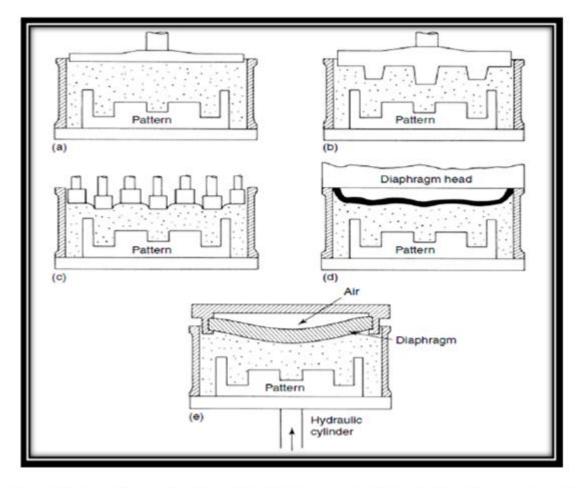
Designs of squeeze head for mold making (a) conventional squeeze, (b) profile squeeze head, (c) equalizing piston squeeze, (d) diaphragm squeeze, (e) high pressure hydra-pneumatic squeeze.[1]
